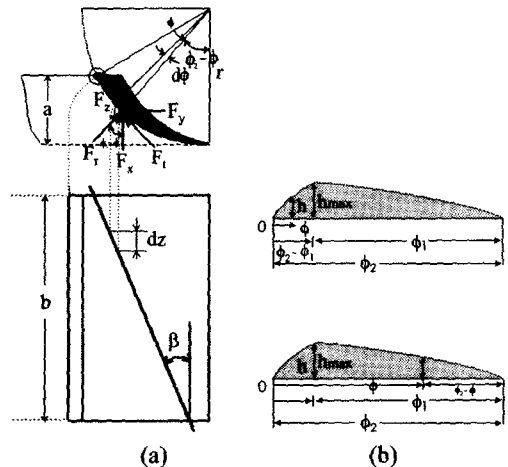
(a) Coordinate system for cutting force components and (b) spread undeformed chip cross-sections in down-end milling
